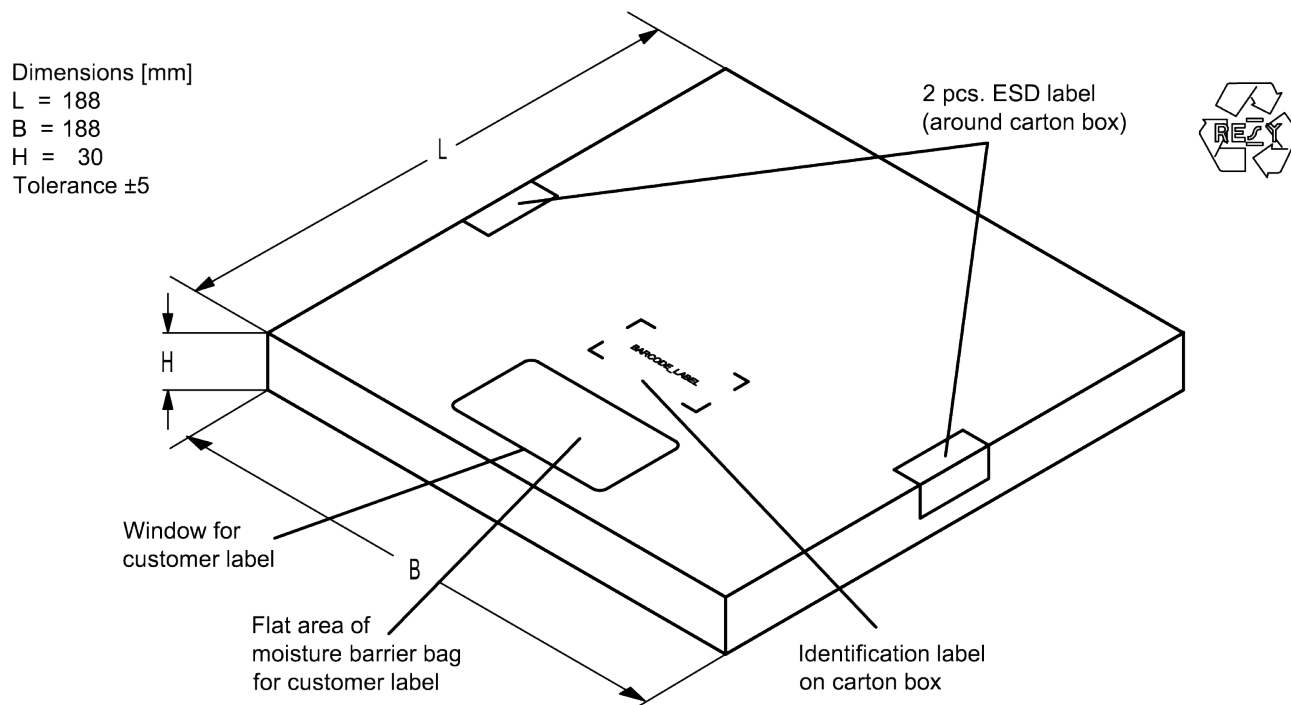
Drawing of folding box for reel with diameter of 180 mm.
